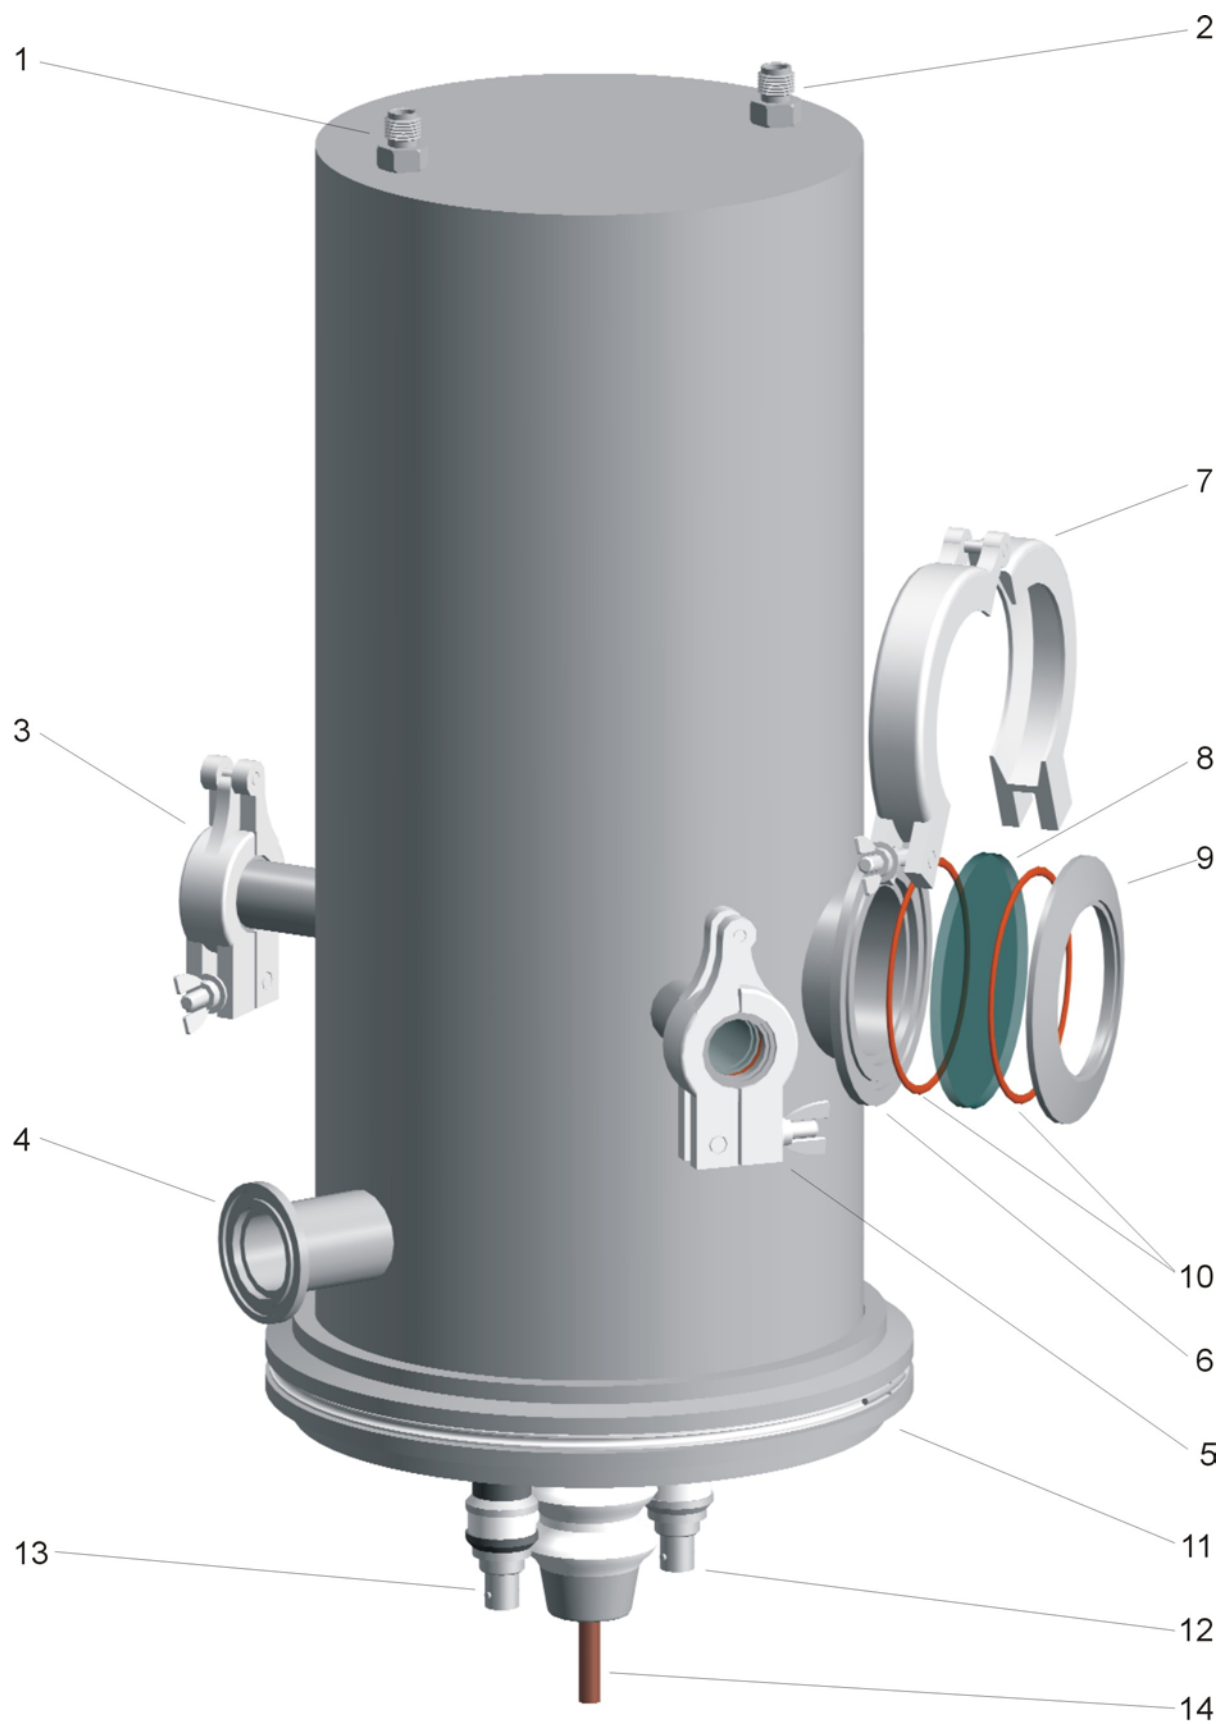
The experiment chamber. 1 port for pressure gauge, 2 gas inlet, 3 polarimetry viewport (incident laser beam), 4 vacuum port, 5 polarimetry viewport (reflected beam), 6 radiometry viewport, 7 hinged clamp, 8 window, 9 outer flange, 10 O-rings, 11 baseplate, 12,13 BNC feedthroughs, 14 current feedthrough.
